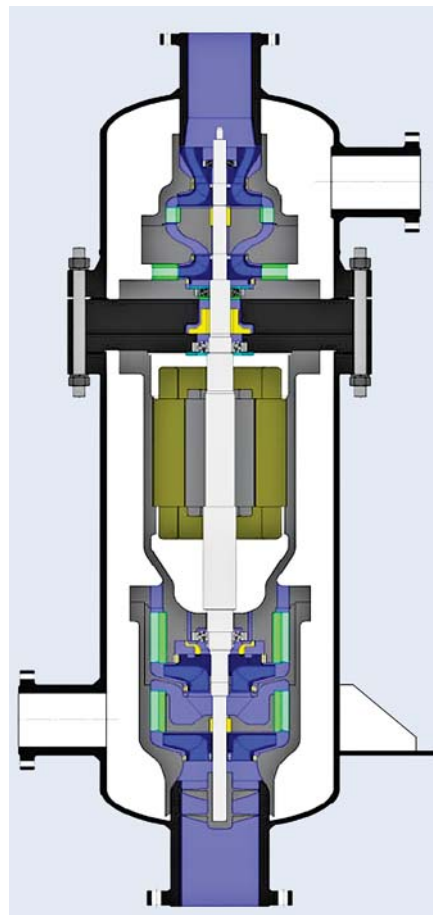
Compact assembly of a pump two-phase expander (PTPXG) generator cooled by propane or a similar explosive fluid.
